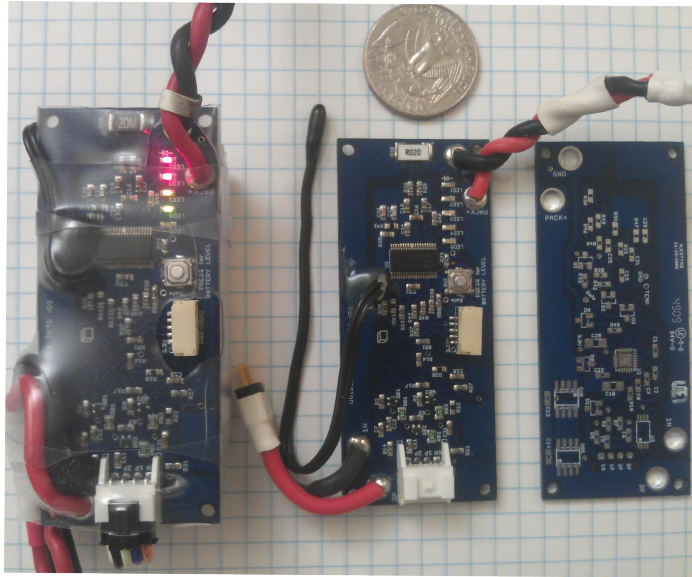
From right to left: bottom side of the fabricated fuel-gauge PCB (shown unpopulated); top side of the same PCB, but populated with components; the same board used with a $3S1P$ LiPB pack.
